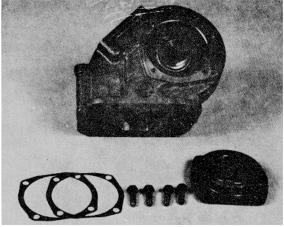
B-7. Closed Bearing Cap Components 7. Using bearing pullers, remove bearing (21) from shaft (02). Figure 11B-8.
